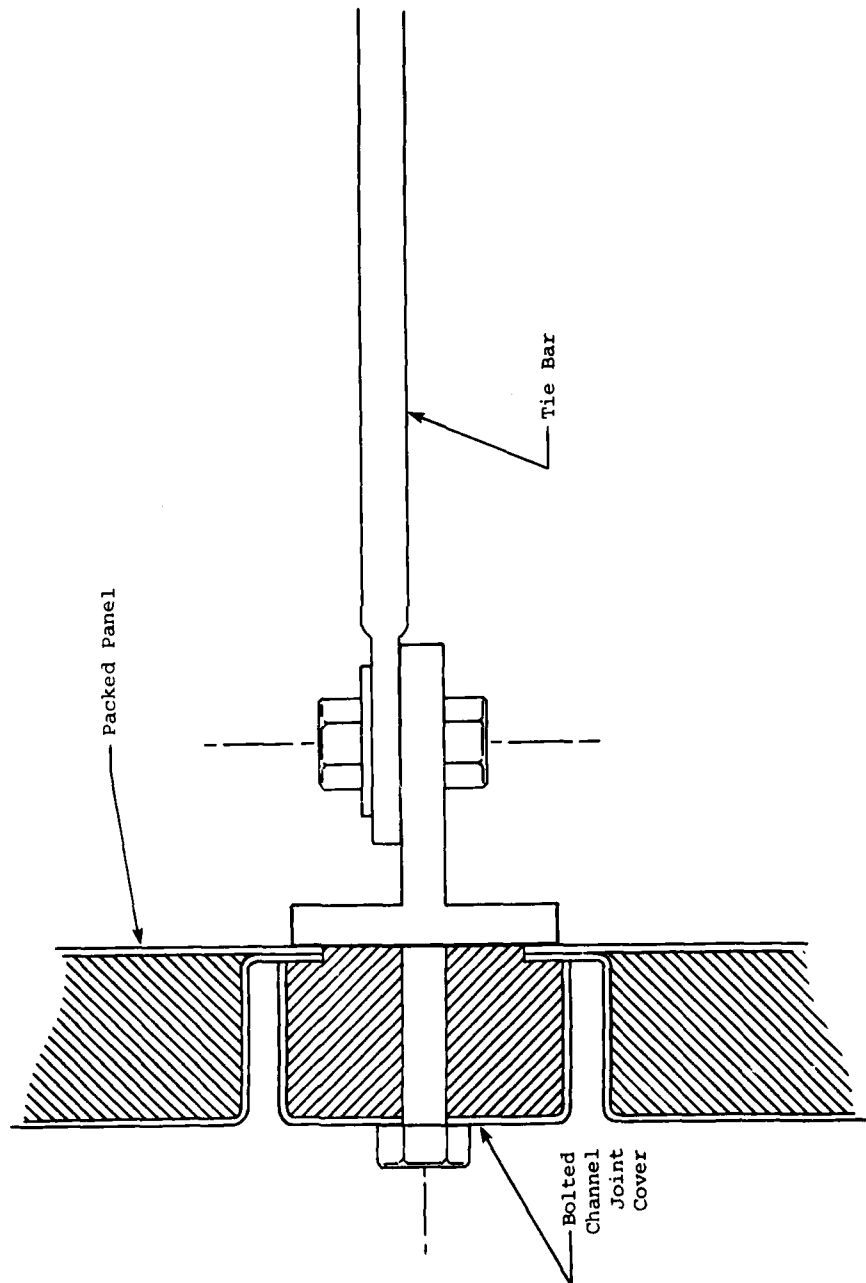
FW BOILER AIR-CASING PANEL JOINT
